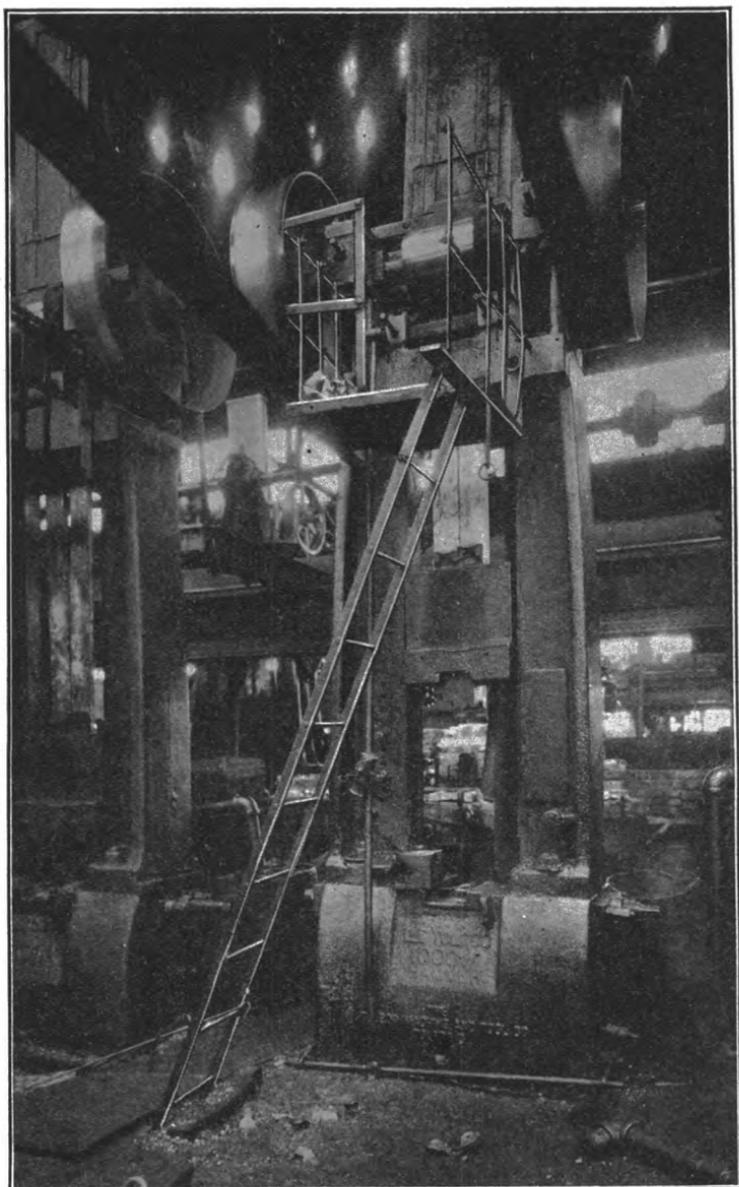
Overhead platform with railing and ladder, for working on rolls. Rolls and treadle should be covered. (Rule 141)
